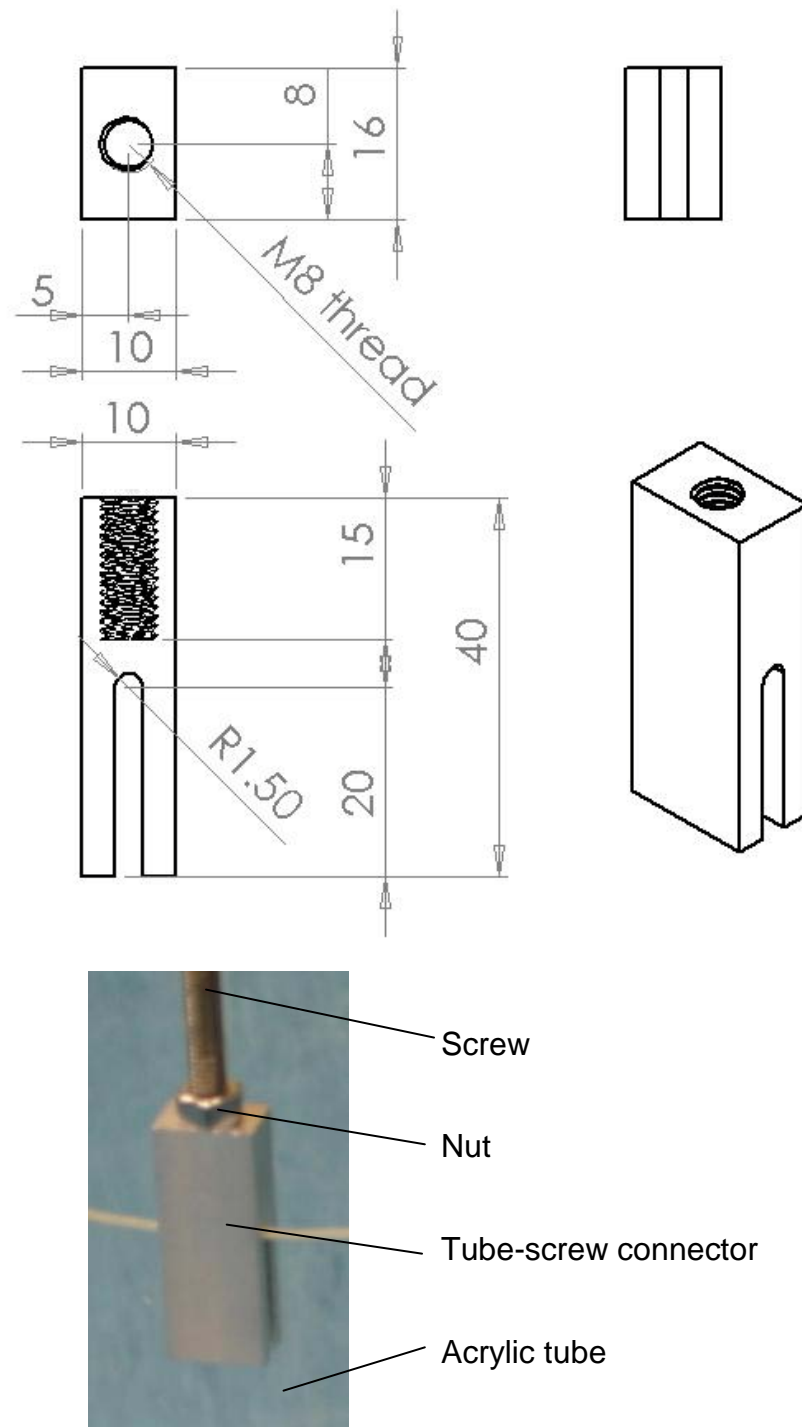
Tube-screw connector provides a platform for vertical screw attaching on the edge of acrylic tube.
